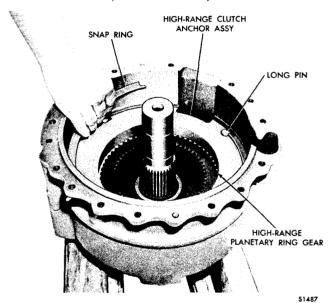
Installing clutch anchor snapring (-3 overdrive model)
